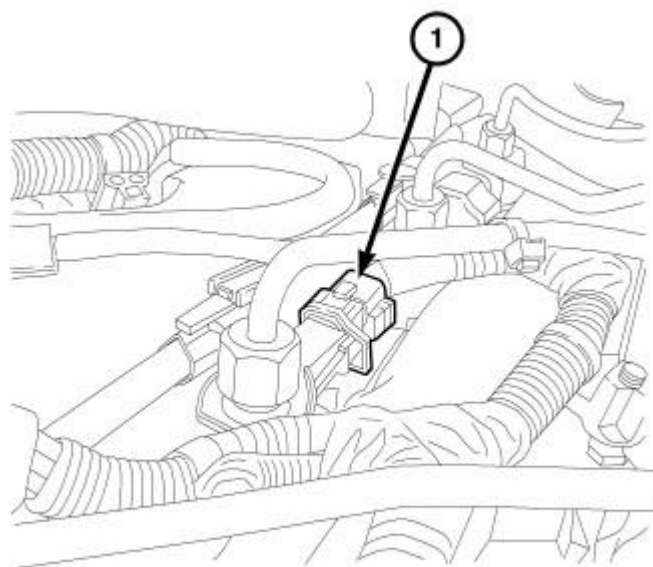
CAMSHAFT POSITION SENSOR HARNESS CONNECTOR
